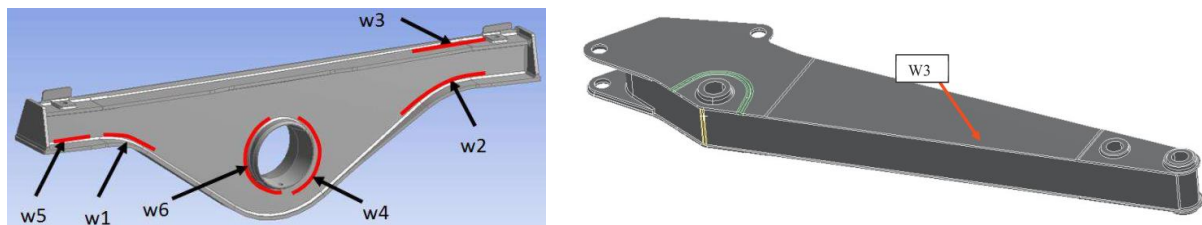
New design of both boggi beam (left) and excavator arm (right) [33].
